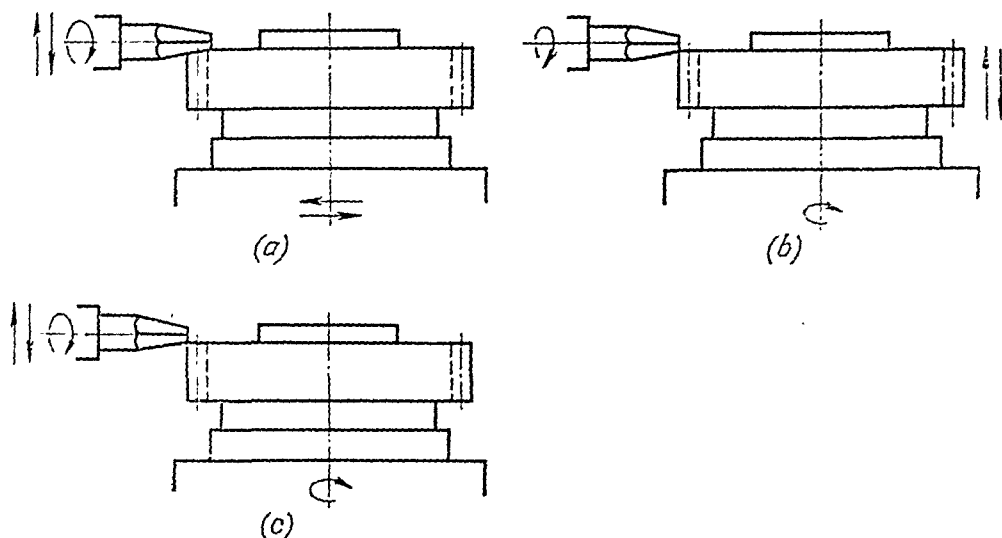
Methods of rounding ends of gear teeth with an end-mill type cutter whose axis is in a plane parallel to the end face of the gear
